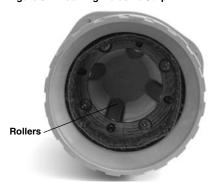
Inspection of Abrasive Strip, Foam Backing & Rollers
